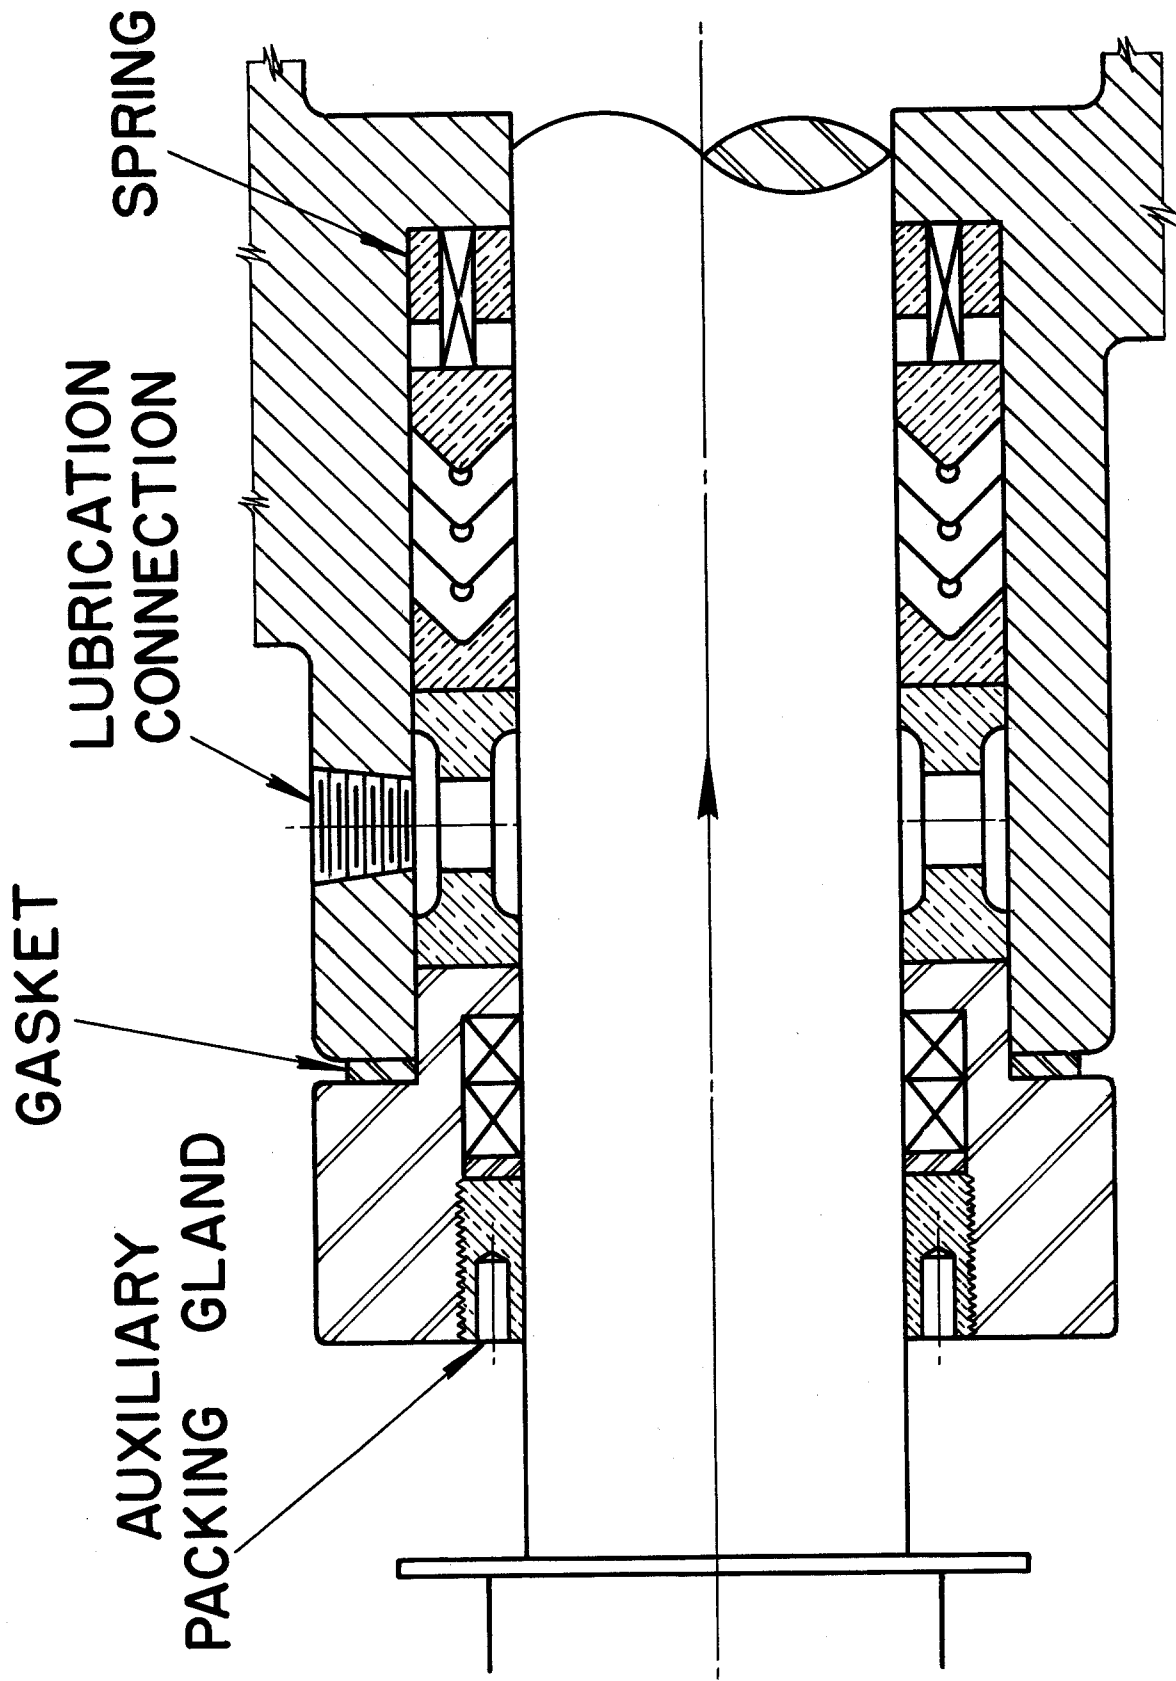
Centrifugal pump packing for heavy-solids-bearing oils.
